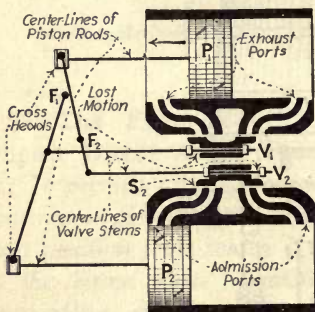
Piston  $P_2$  At End Of Inboard Stroke And On Point Of Reversal—Piston  $P_1$  Approaching End Of Inboard Stroke.
